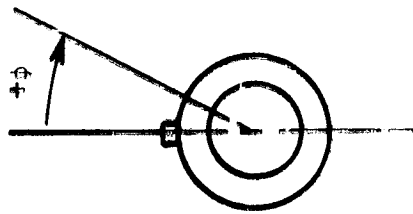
INSTALLATION OF SEPARATION ROCKETS AND ELECTRICAL TUNNEL
